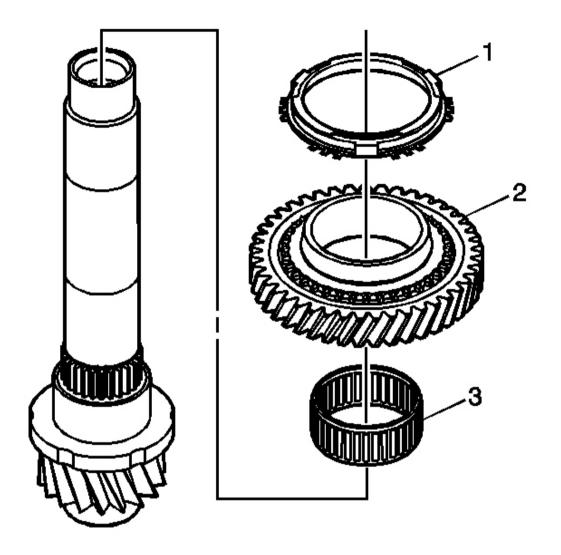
Installing Reverse Gear, Reverse Gear Blocking Ring And Caged Needle Bearings Courtesy of GENERAL MOTORS CORP.
